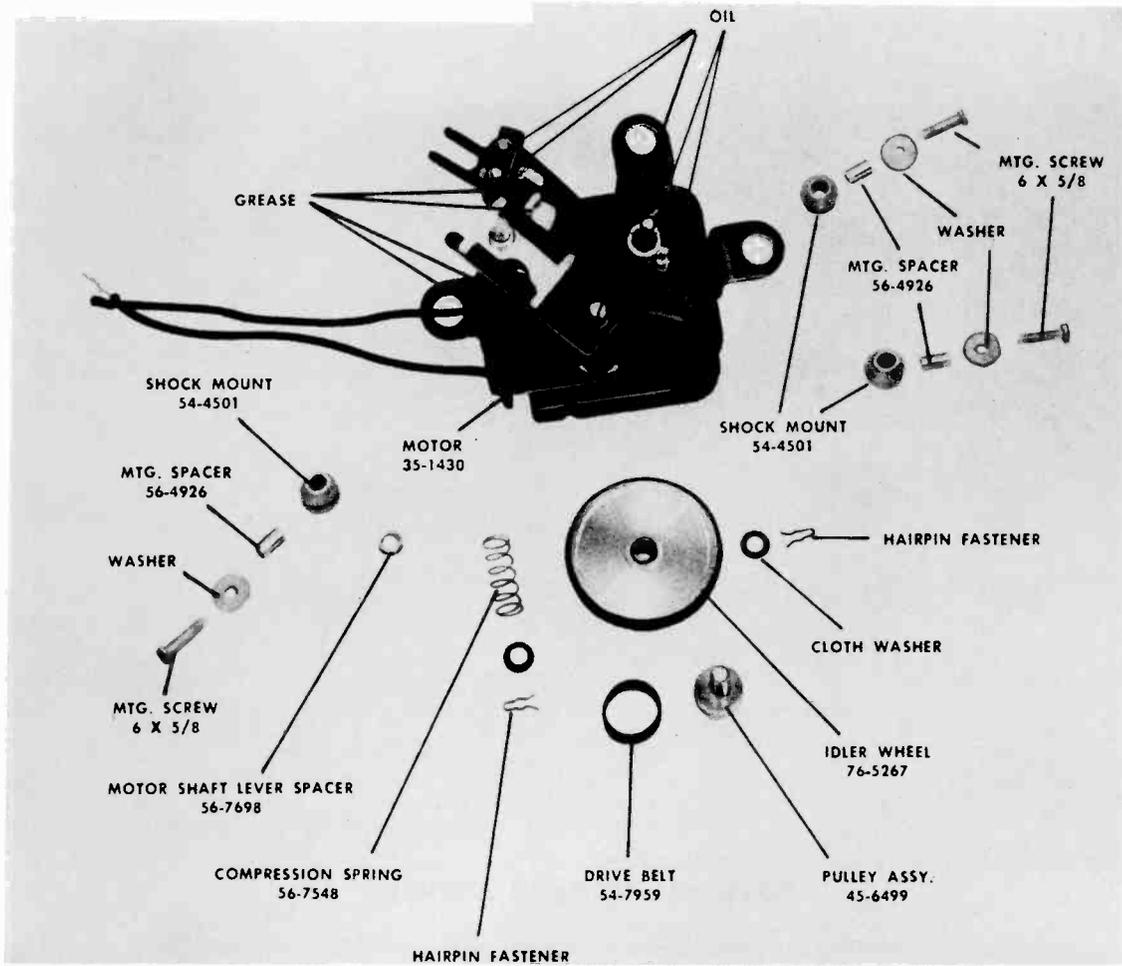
MOTOR ASSEMBLY—PART NO. 35-1430
